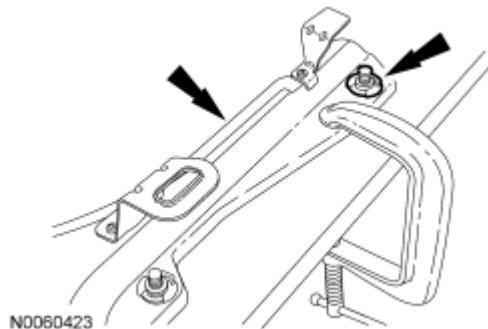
Clamping Side Plate To A Bench Or Table Using A Suitable Tool
